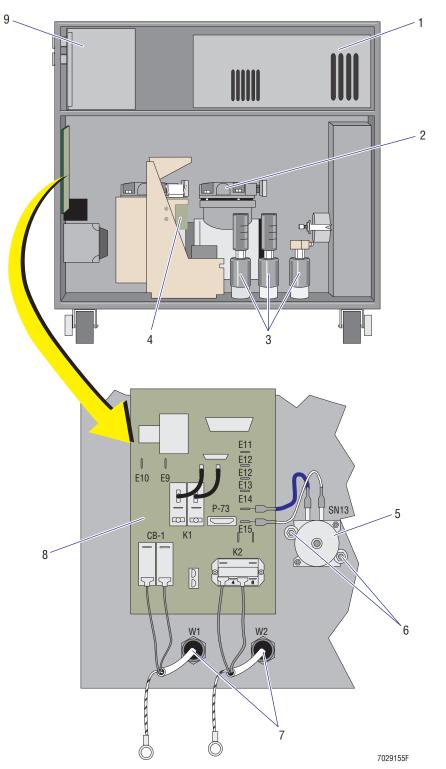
Power Supply Module - Left Side with Cover Removed (See Table 8.2-45)
